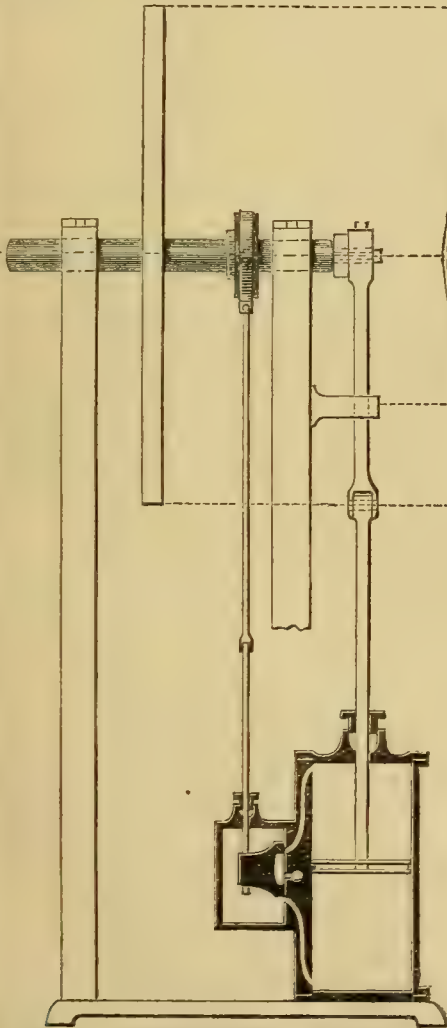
WORKING DRAWING—SIDE VIEW.
